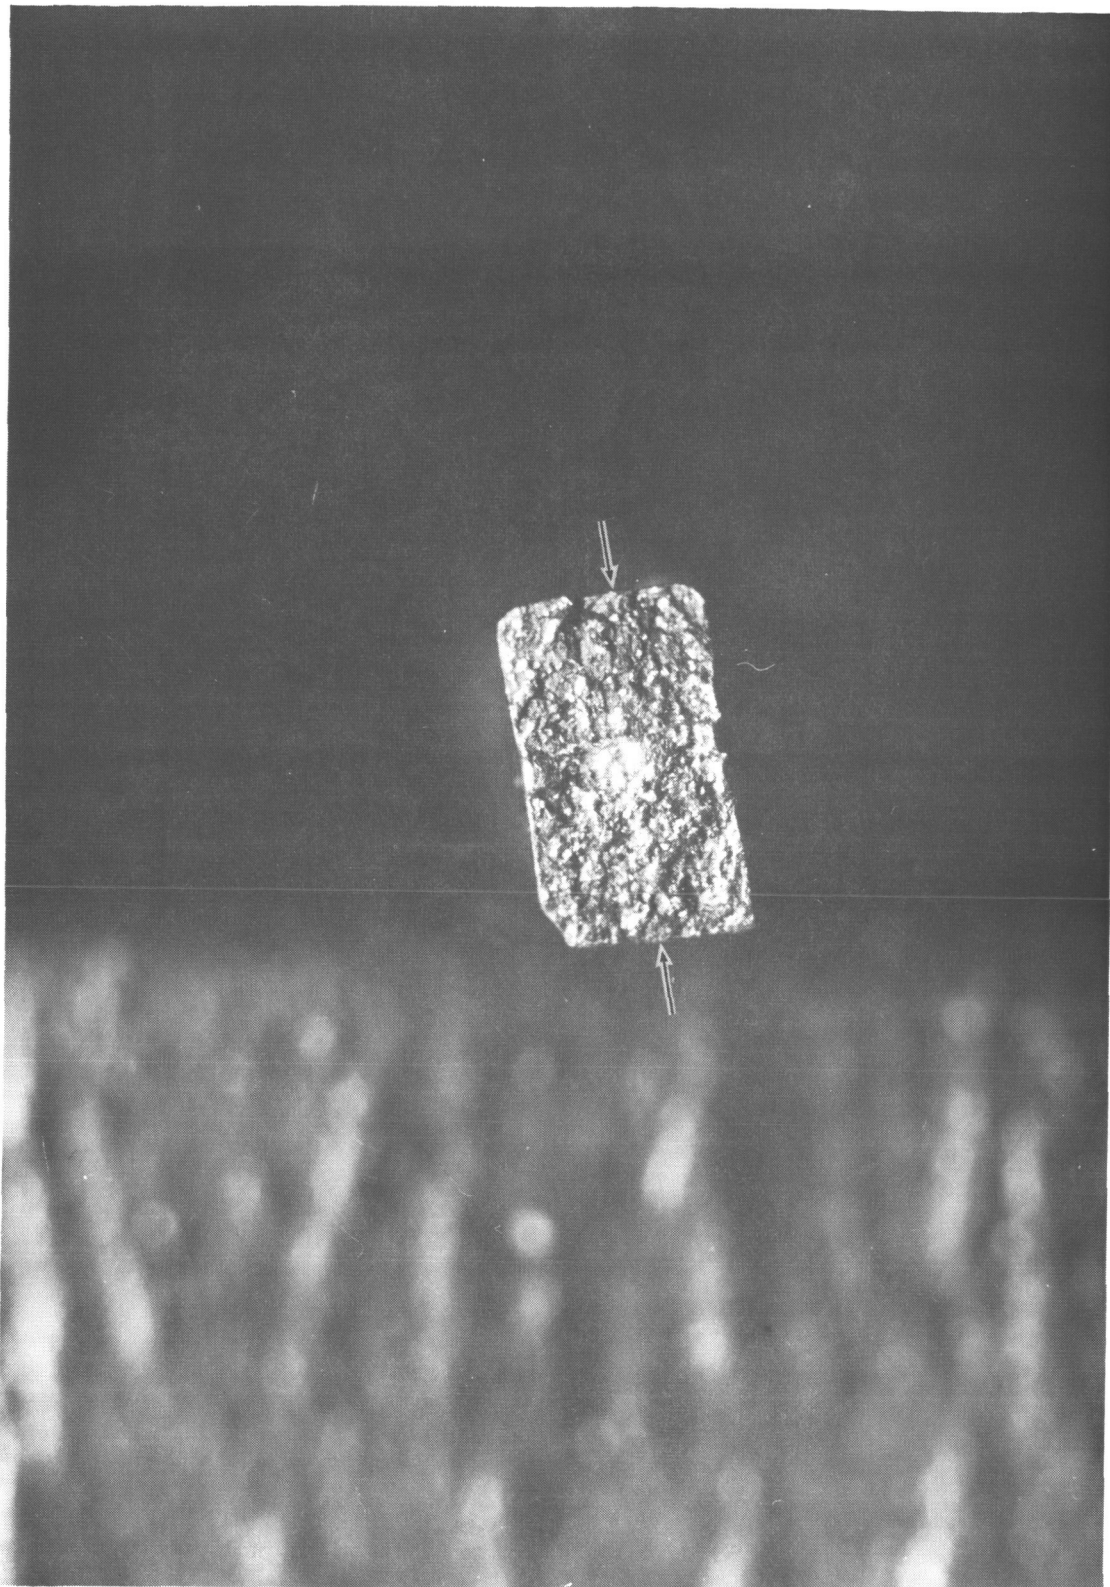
Closeup of Typical Beam Fracture Showing Fatigue Failure Progressing from Origins (Arrows)
